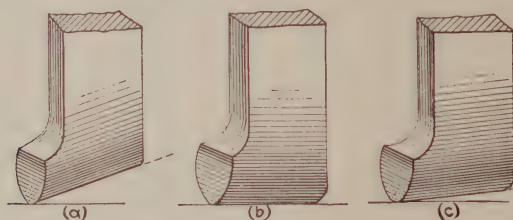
Front clearance on shaper tool: (a) too much; (b) not any, will rub; (c) correct, about 3 deg.
